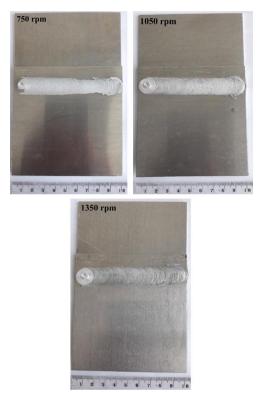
FSLW welds made at different tool rotation speeds
